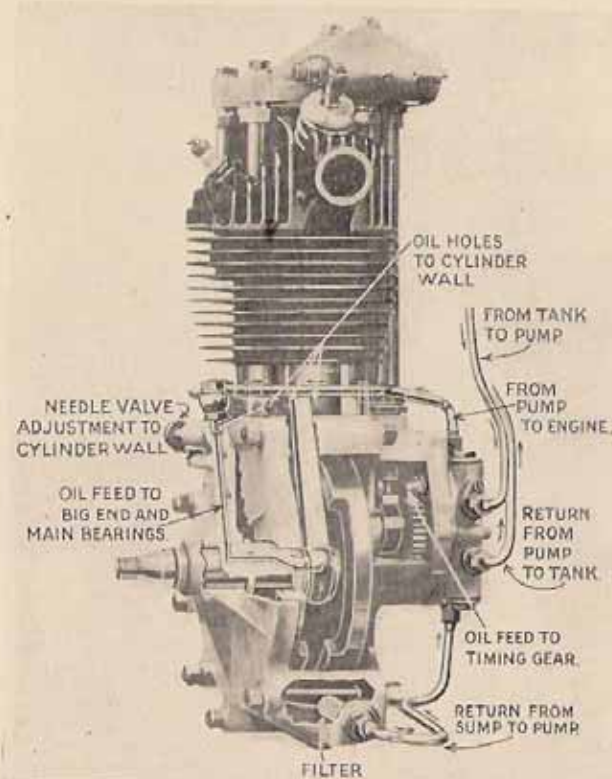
CUT-AWAY VIEW OF O.H.V. ENGINE, SHOWING THE OIL CIRCULATION
